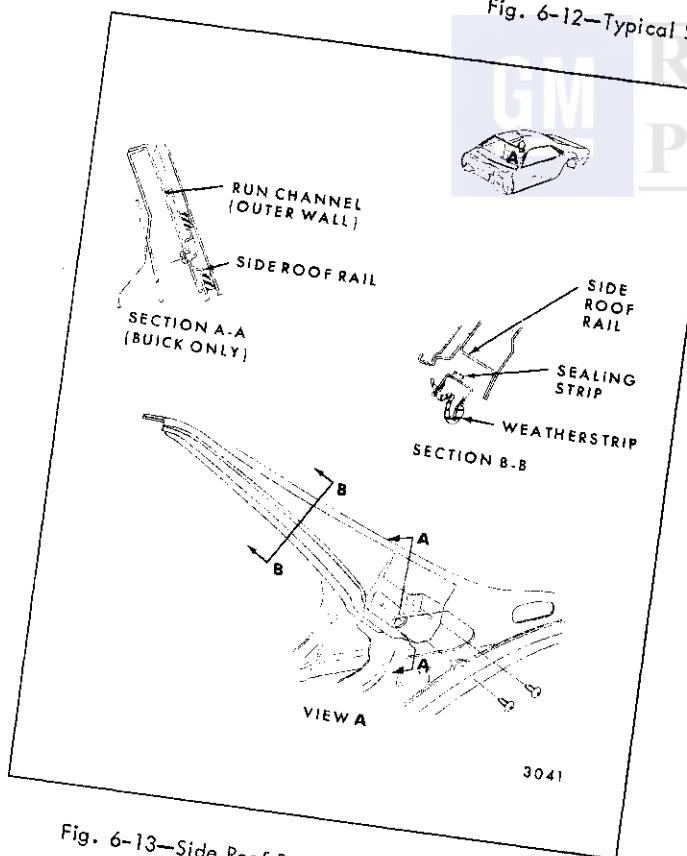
Side Roof Rail Weatherstrip Assembly -
